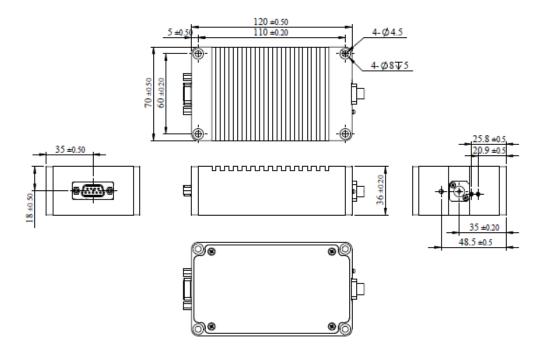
Mechanical drawing of IPSDW0821-0314 module
